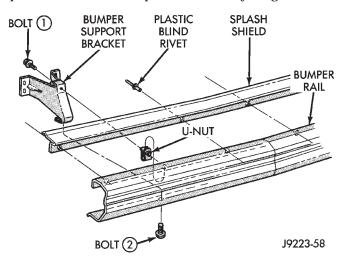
Bumper Bracket & Splash Shield Removal/ Installation—XJ Vehicles
